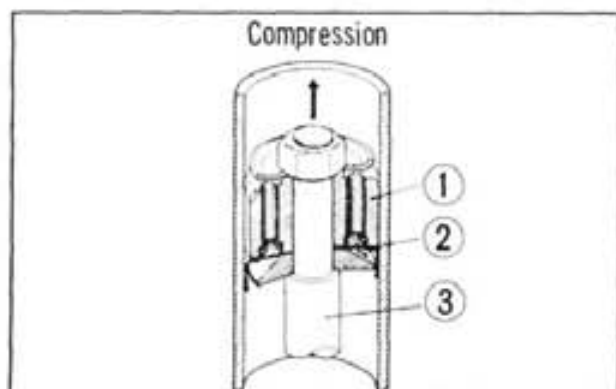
① Piston ② Valve ③ Rod
